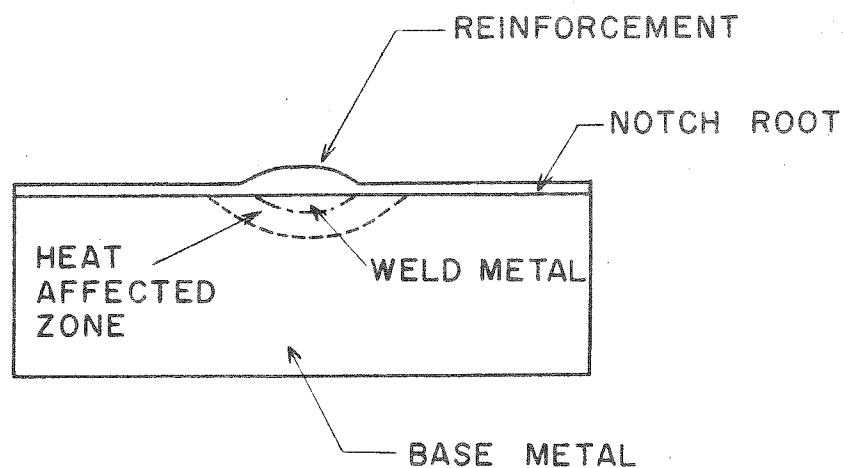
Section of Figure 1 at AA Showing Areas Exposed at Notch Root of Welded Kinzel Specimen.
